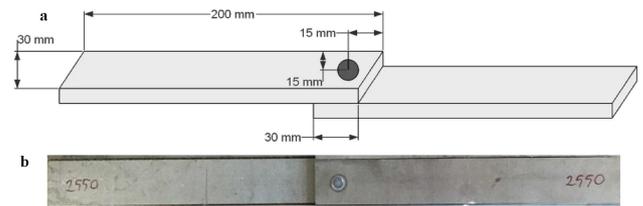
(a) The dimensions of the tensile–shear specimens, (b) specimen welded by resistance spot welding.
